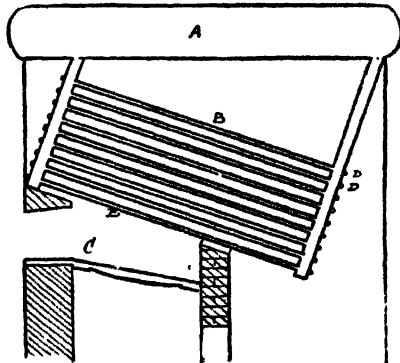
BABCOCK &amp; WILCOX WATER-TUBE BOILER.
